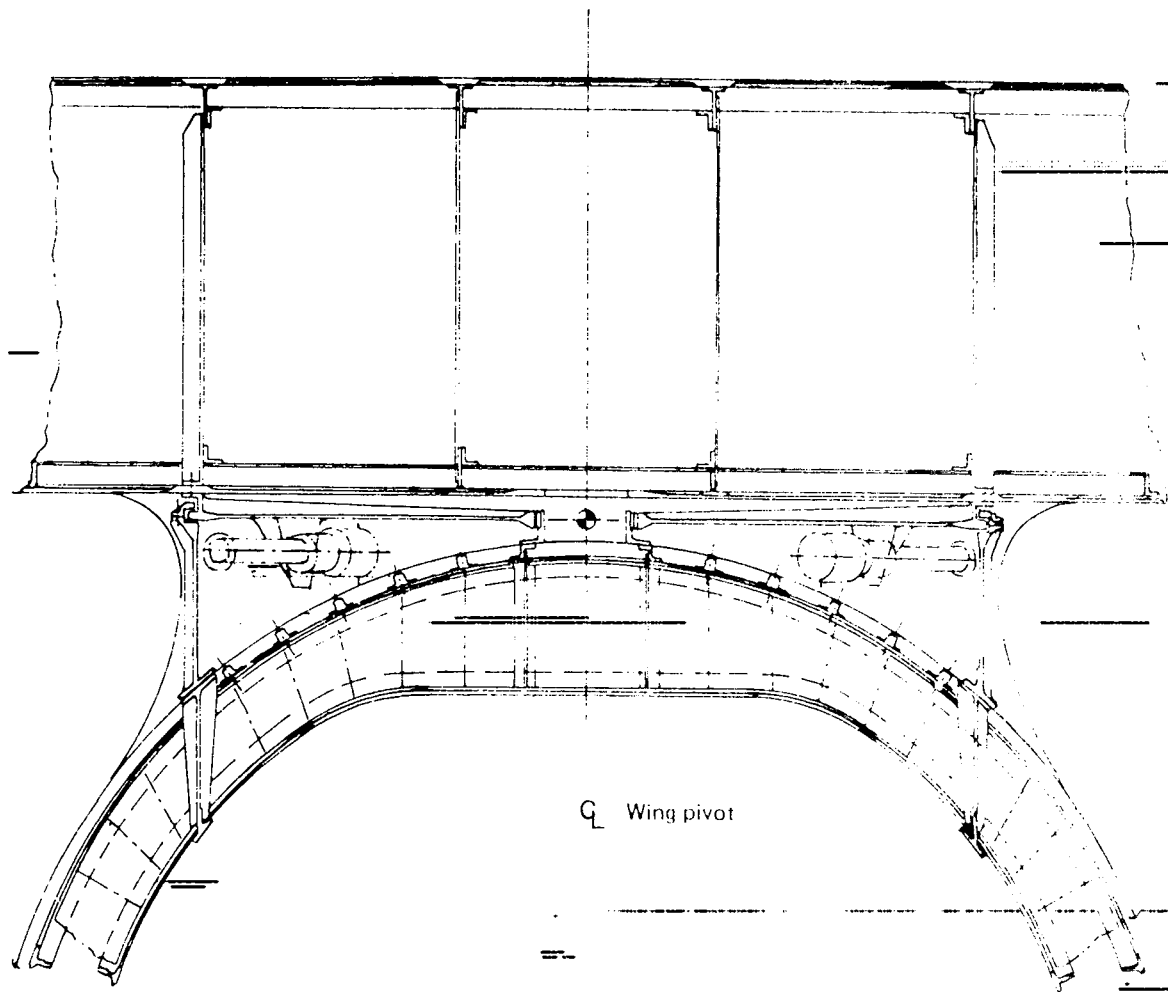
Center Pivot and End Journal Bearing (No. 7)
